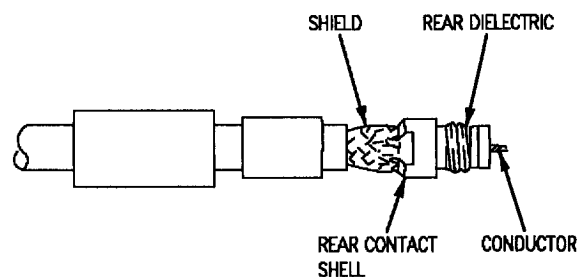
885-270-001 Coaxial Assembly Procedure (Sheet 1)
